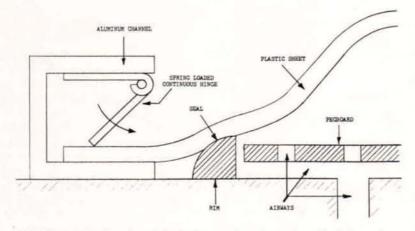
Cross-section view of plastic sheet, rack, and vacuum table during a forming operation.
